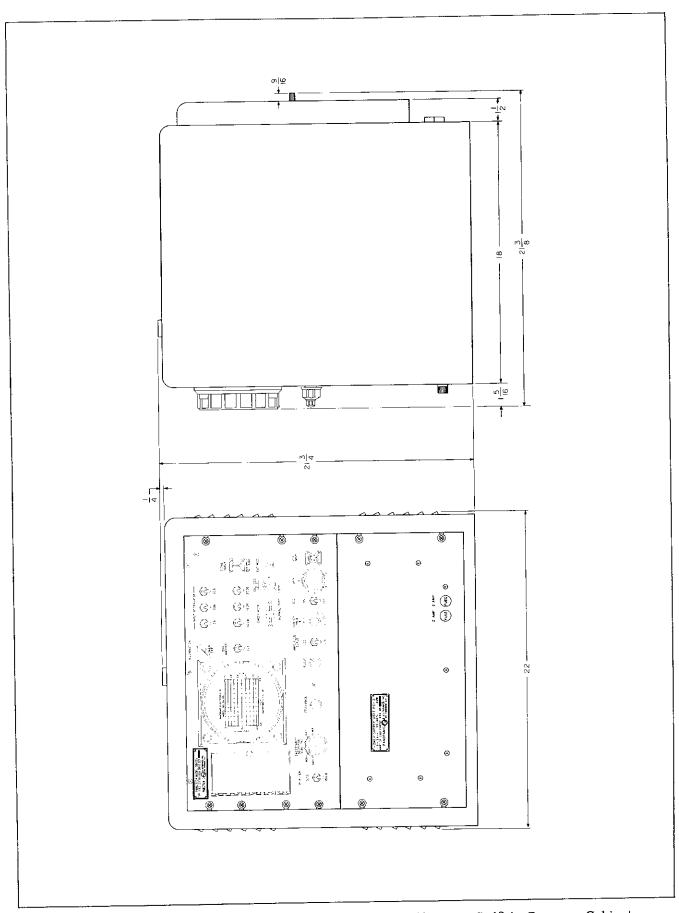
Outline Dimensional Drawing, Models SB-12b and PS-12 in Common Cabinet.
